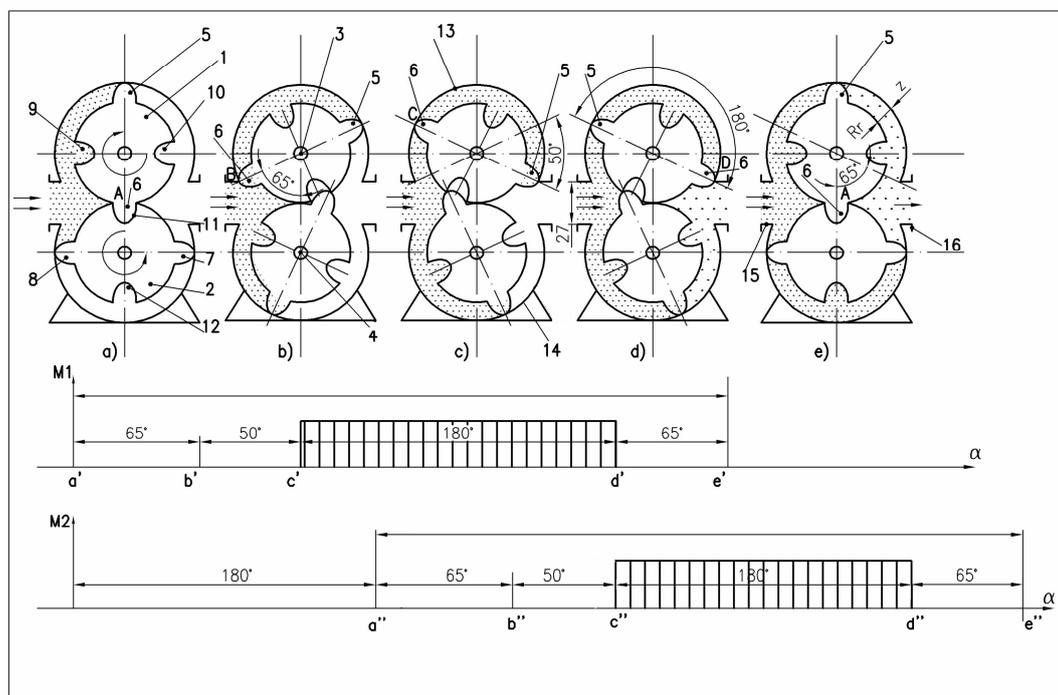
The motor torque developed by the steam pressing on the rotating pistons (5) and (6) of the upper rotor (1)
